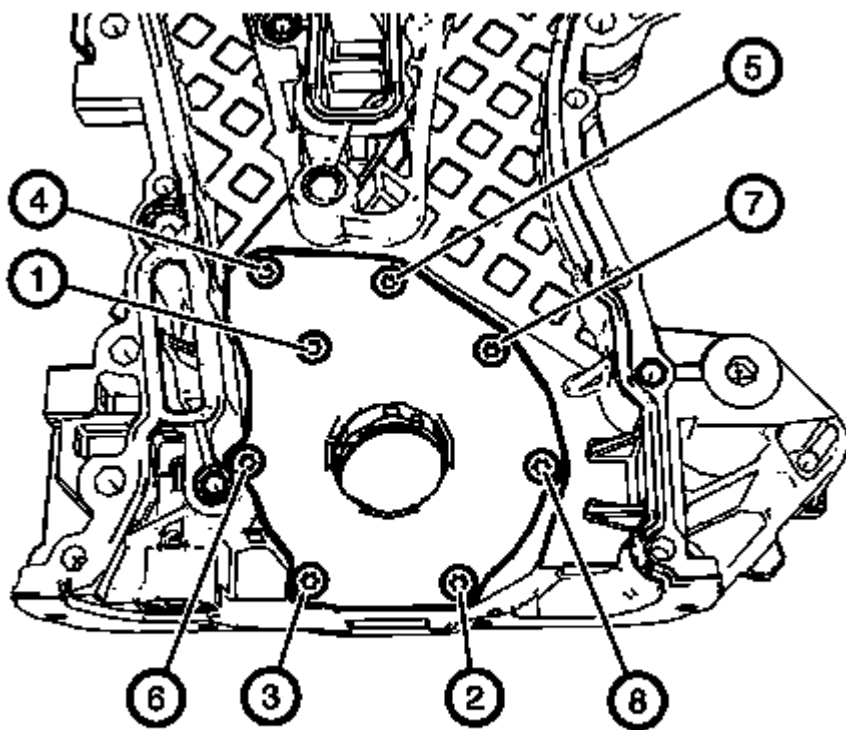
Oil Pump Cover Bolts Tightening Sequence
